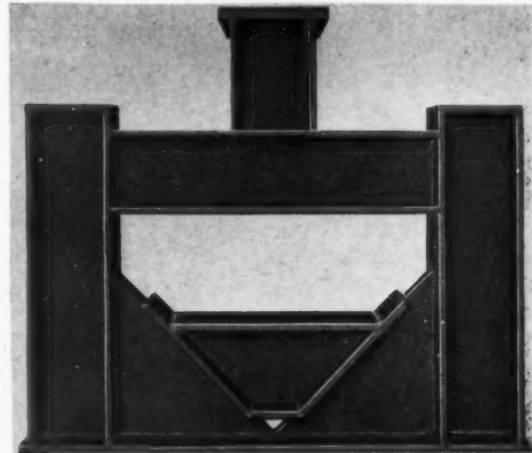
SHOCK TEST PIECE BEFORE TESTING
